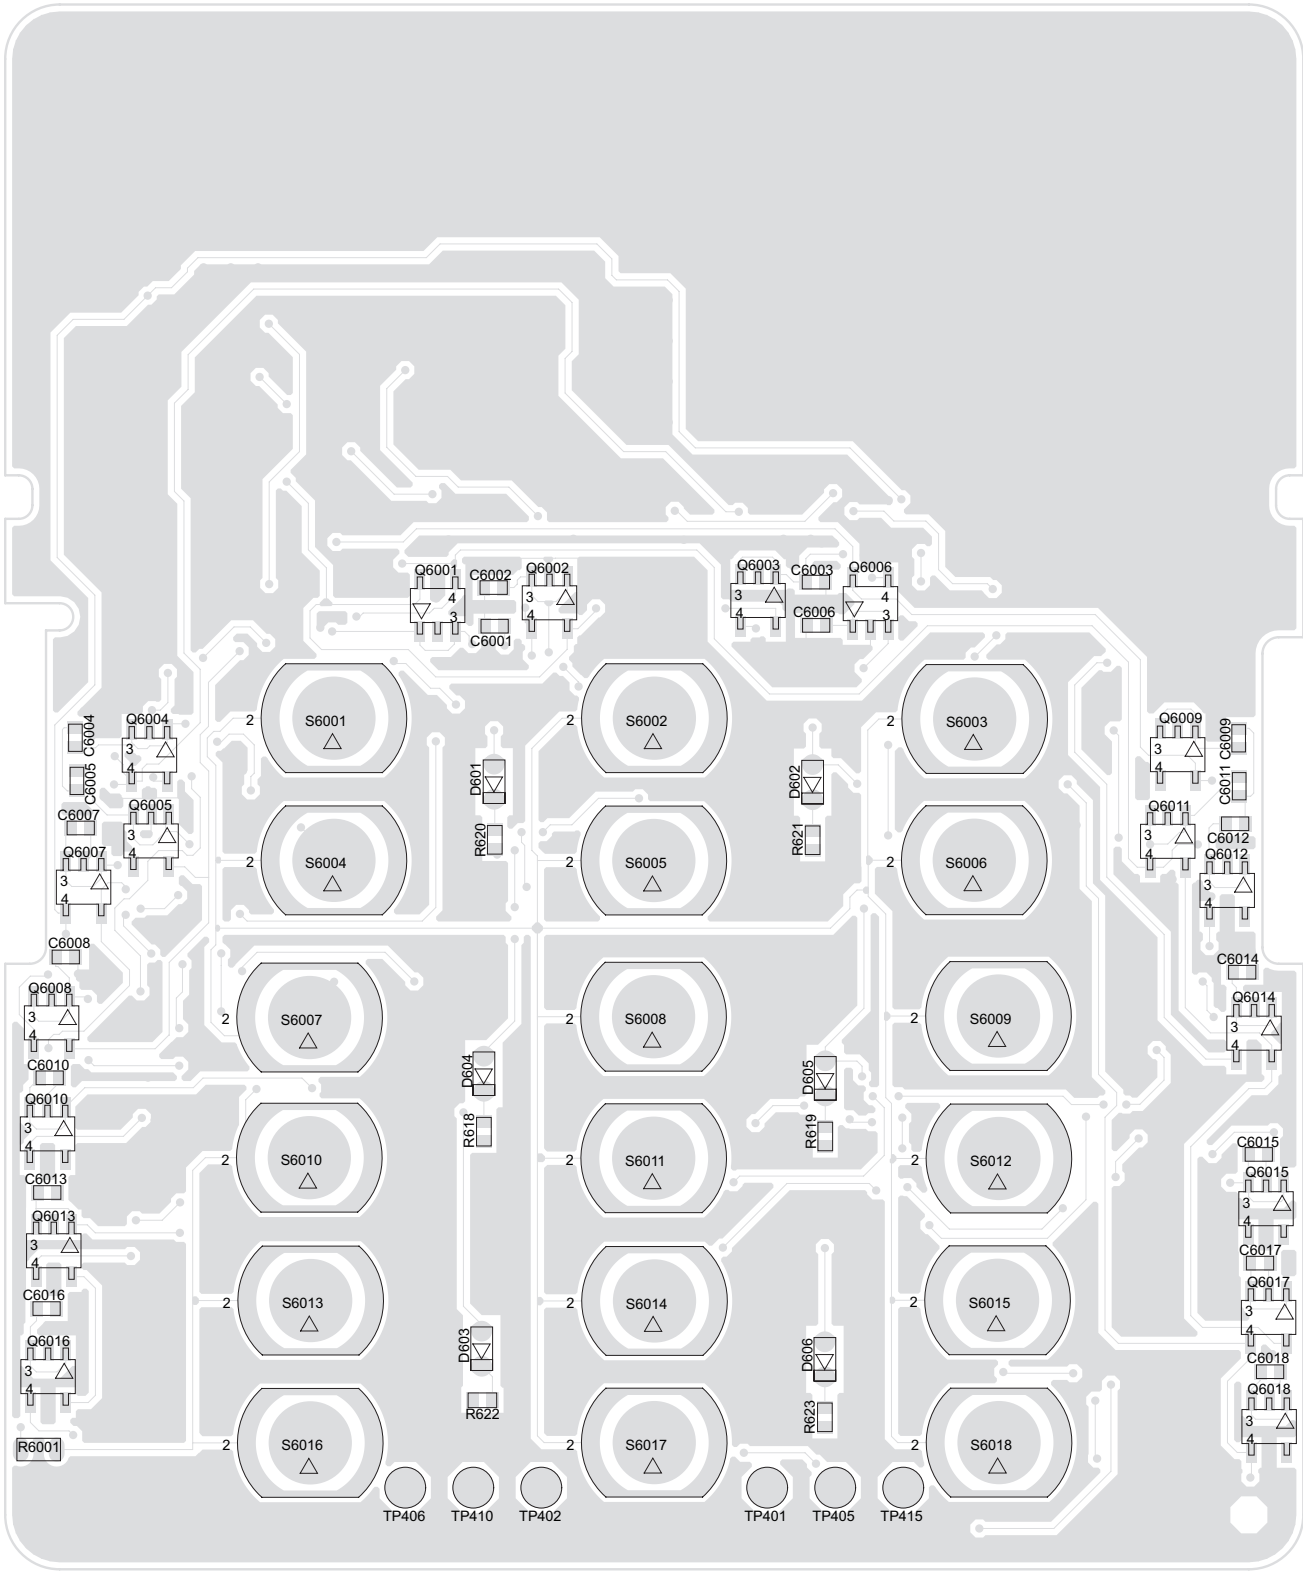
Controller Board Top View (PCB No. 8471678L01)
